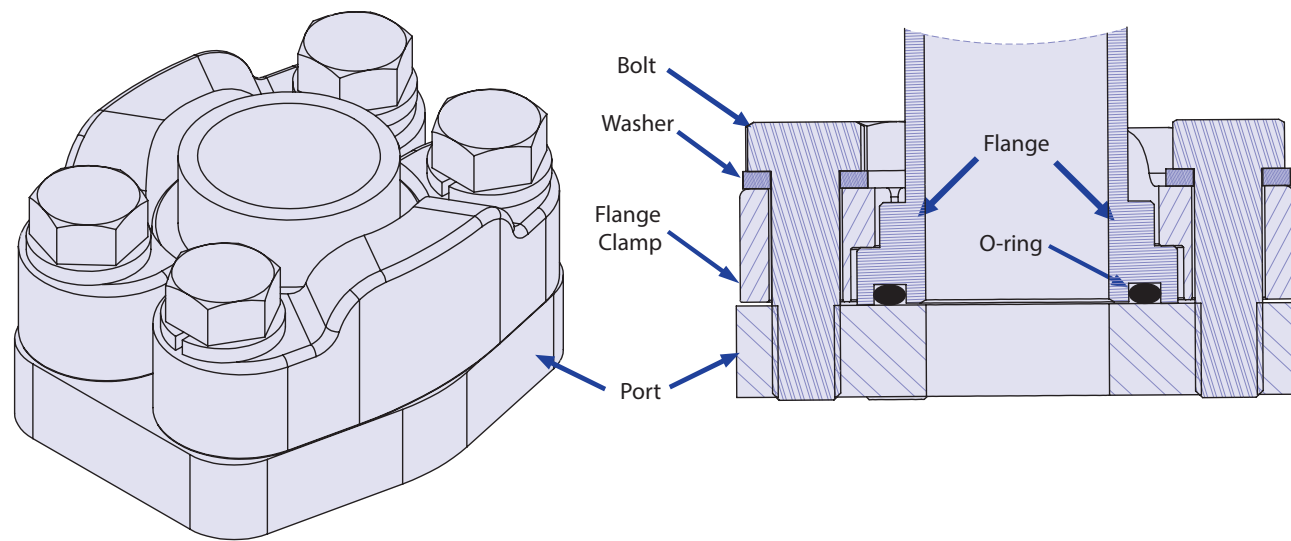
Flange Port Assembly (Left) Cross Section Flange Port Assembly (Right)
